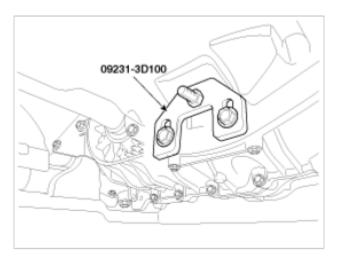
Installing SST (09231-3D100) Using Mounting Bolts
